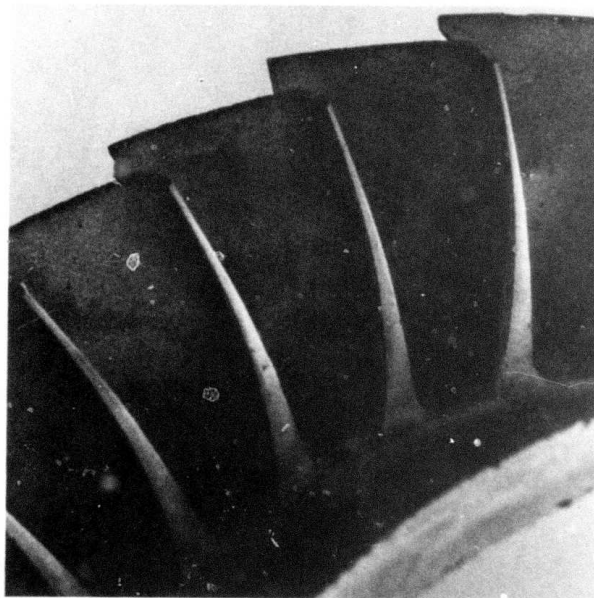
CVD Silicon Carbide Rotor Showing Fully Filled Blades
